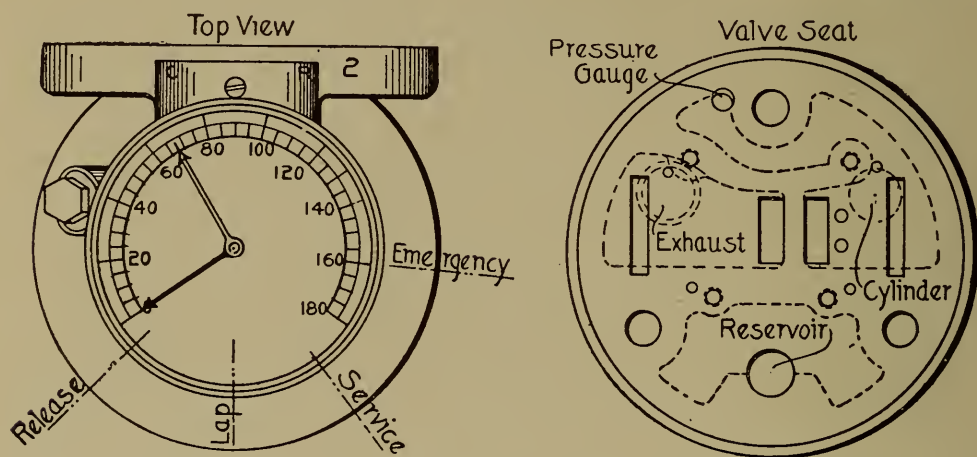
Top View and Valve-Seat of Westinghouse Straight Air-Brake.
